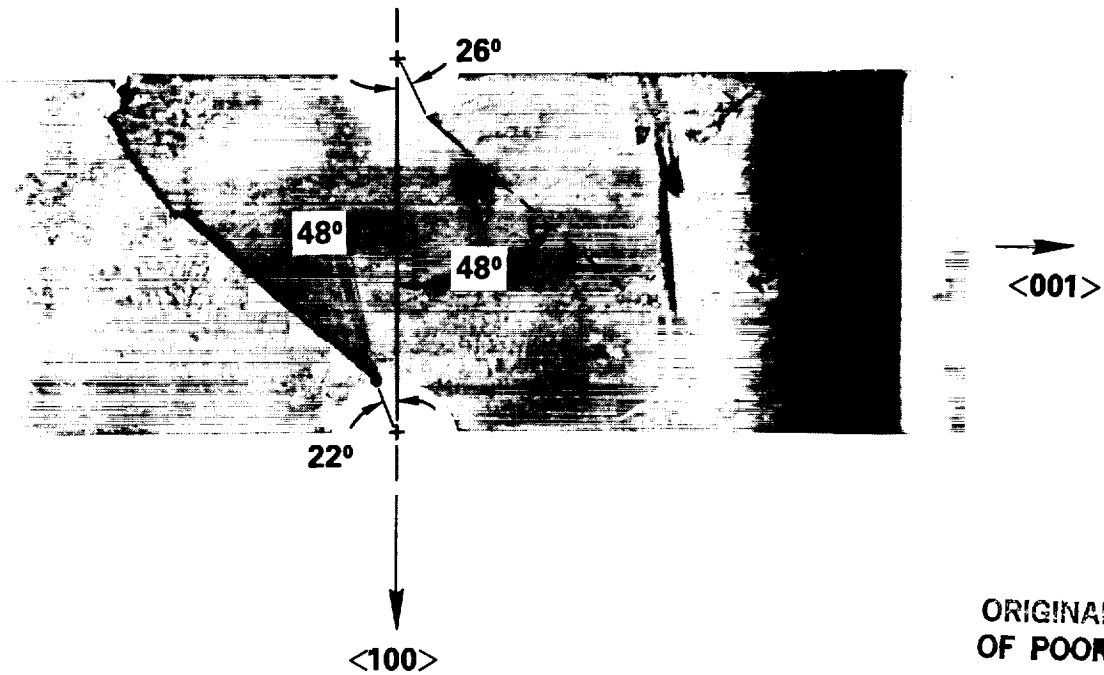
Fatigue cracks initiate at the maximum principal stress location with crack planes perpendicular to the principal stress. Cracks progress along $\langle 111 \rangle$ planes in the final stages of crack growth.
